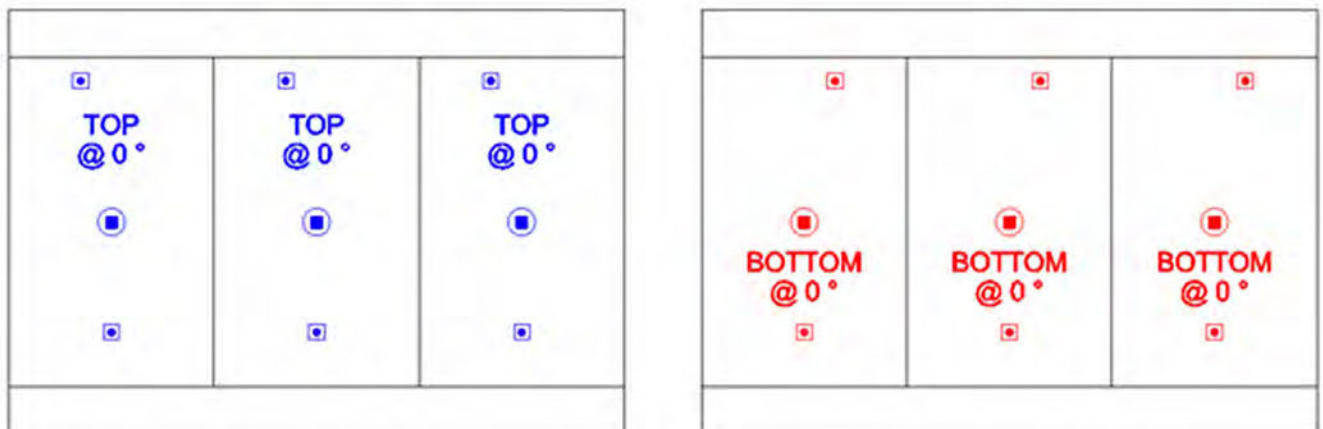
A simple panel array of the top side and the mirrored horizontal view of bottom side components if applicable.
